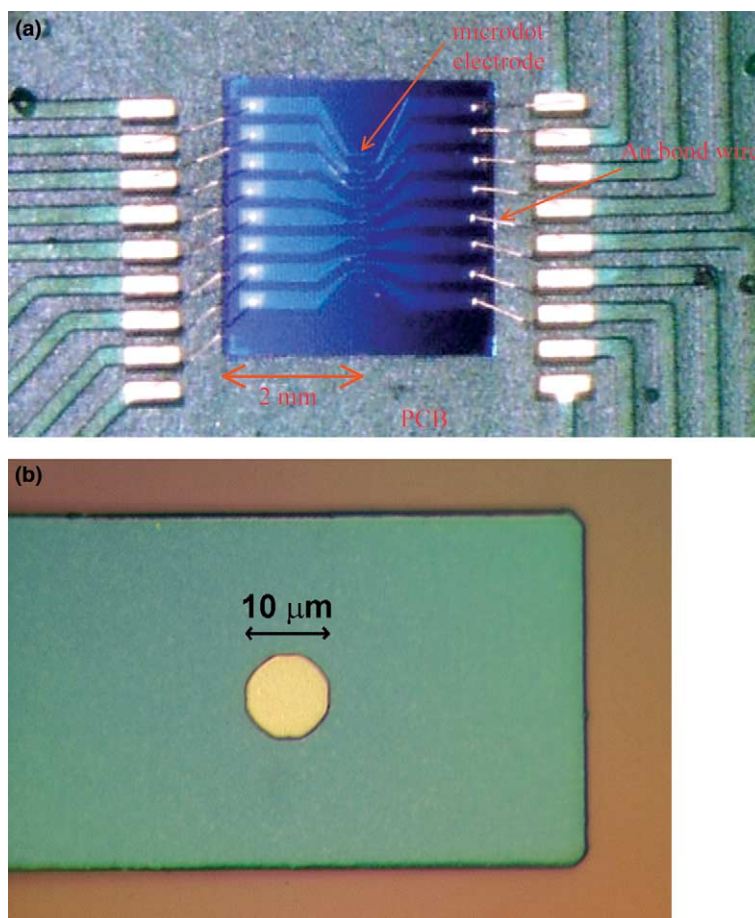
Photograph of a linear array used for SECM imaging. (a) 10 μm diameter Pt microdots on a 16-electrode linear array. This figure shows exposed Au bonding wire connecting the contact pads on the device and on the PCB. (b) Optical micrograph of a microdot on the same device.
